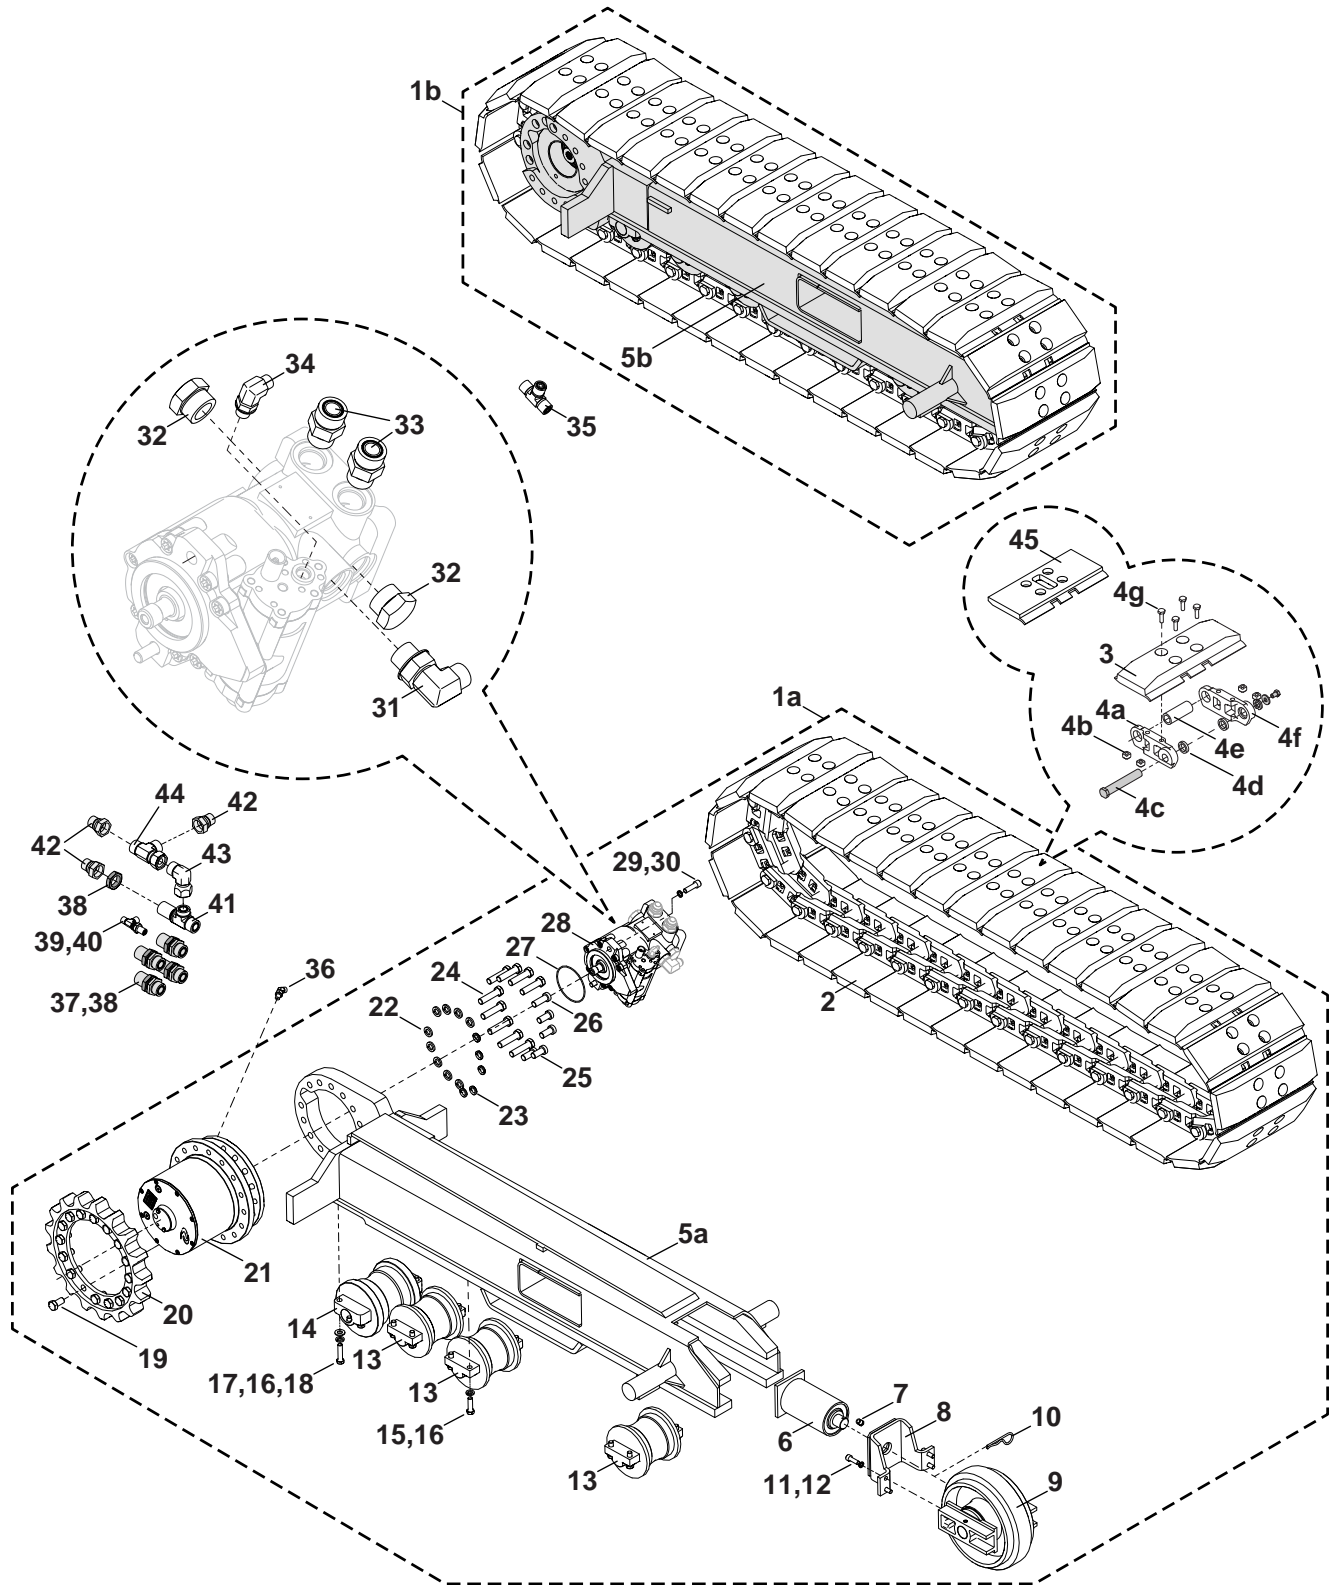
Drive Assembly - Poly Pads/Cast Steel (2 of 2)
